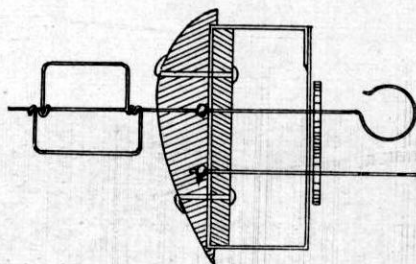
Nose-Piece and Gears. Gears are $\frac{1}{4}$ -in. diam. and Shafts are 18 S.W.G. Steel Wire.
